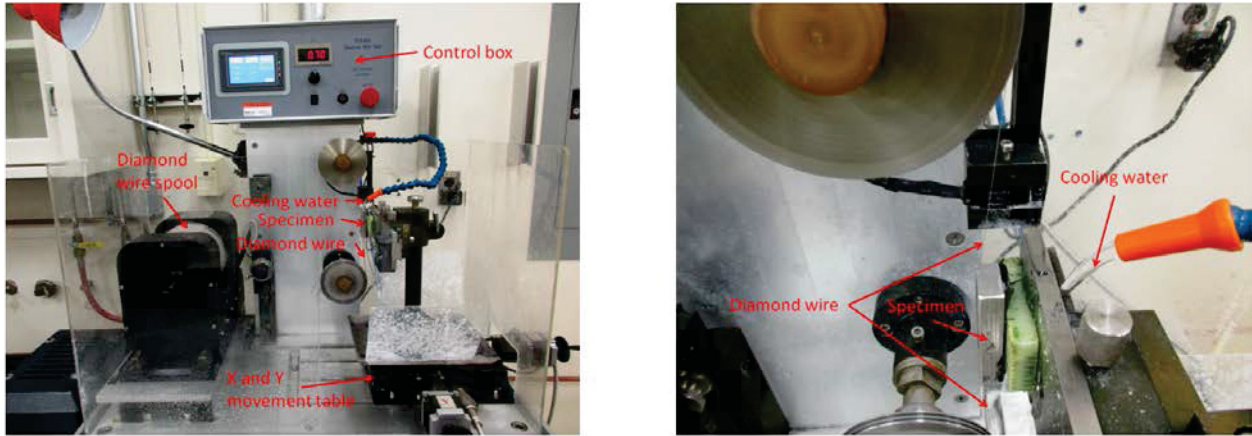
Diamond wire saw machine (L), Diamond wire cut of 304 SS coupon (R)
